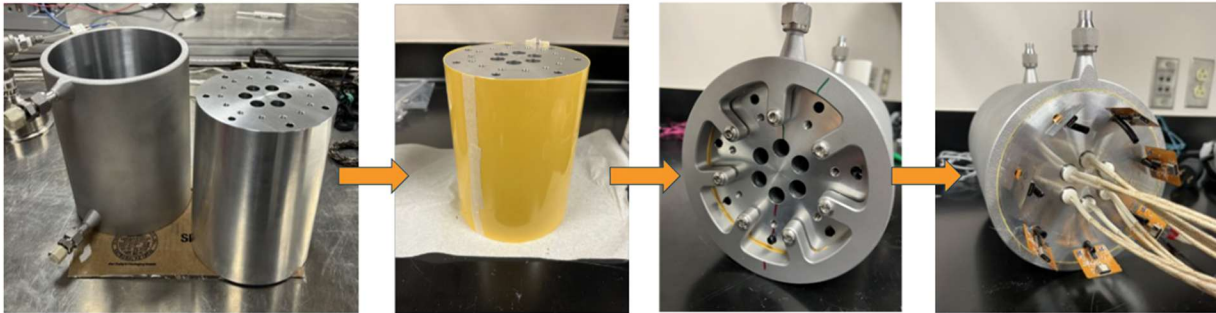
Assembly steps following post processing of the cold plate. A thermal gap pad material wrapped the heating element and secured into place using indexing features on the cold plate structure. The final image shows the installed heater cartridges (center) and profile temperature sensors (outer)
